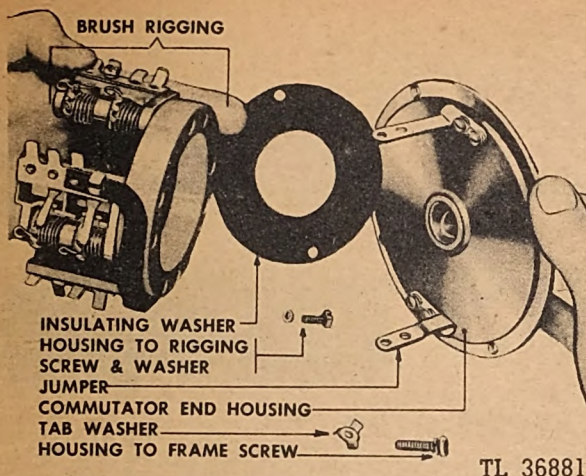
Assembling Commutator End Housing and Brush Rigging
